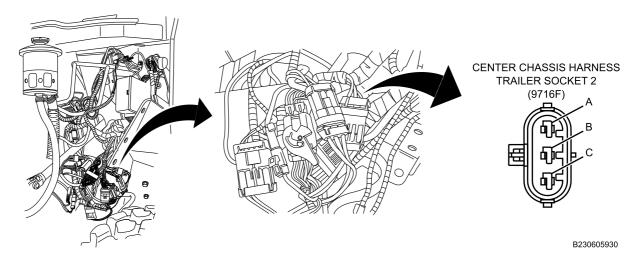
Engine Compartment Under Air Cleaner Assembly.
